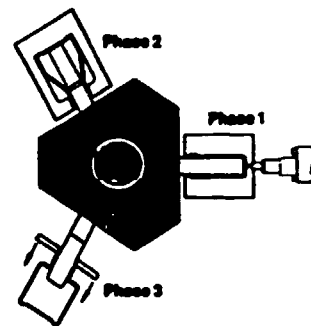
Schematic of injection molding process: phase 1 - Preform molding via injection molding machine; phase 2 - blow molding; phase 3 - ejection.
